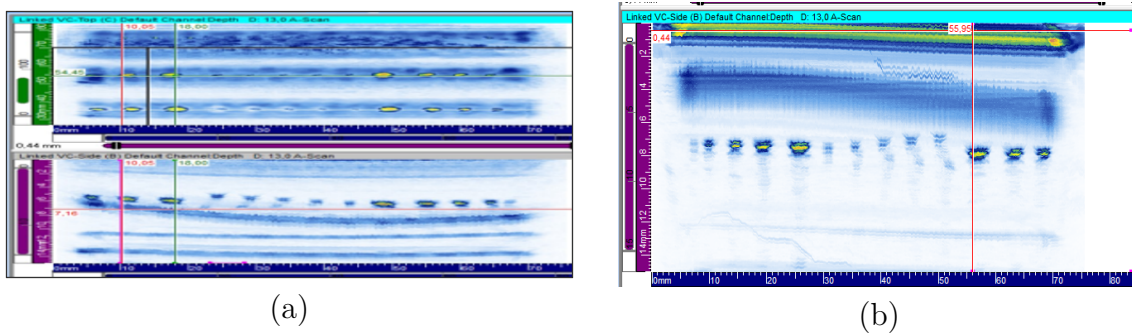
PAUT B-scan results for Block 2 scanned at a depth of 13 mm from the top surface: (a) unmachined surface, (b) machined surface.
